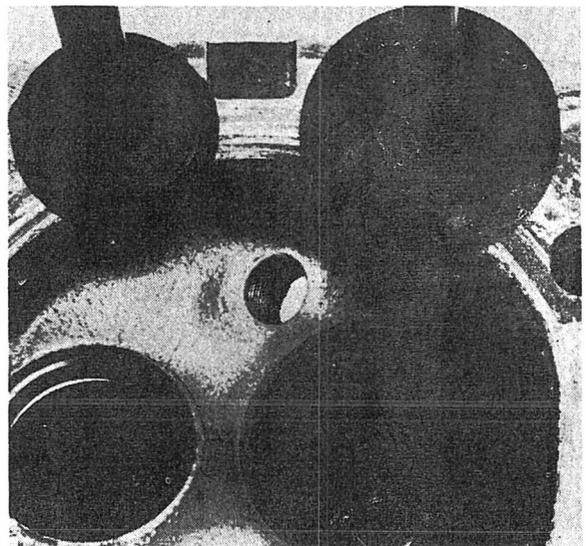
Nonleaded fuel sodium cooled valve wear
